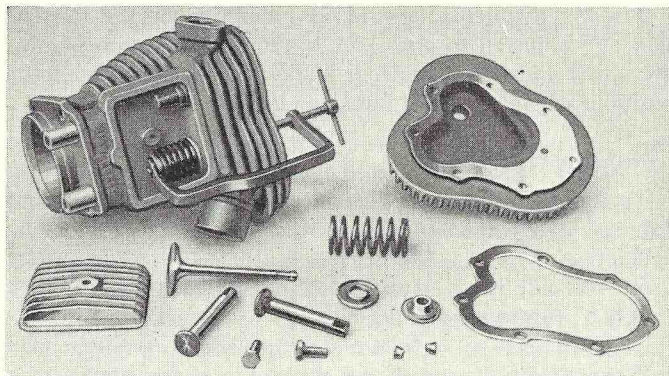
CYLINDER AND HEAD ASSEMBLY (1937-51 600-C.C. SIDE-VALVE).
